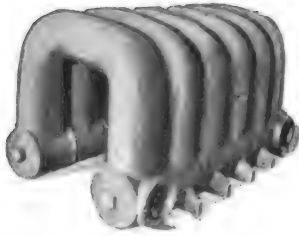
Cast-Iron Coils, Leyner Reheater.
